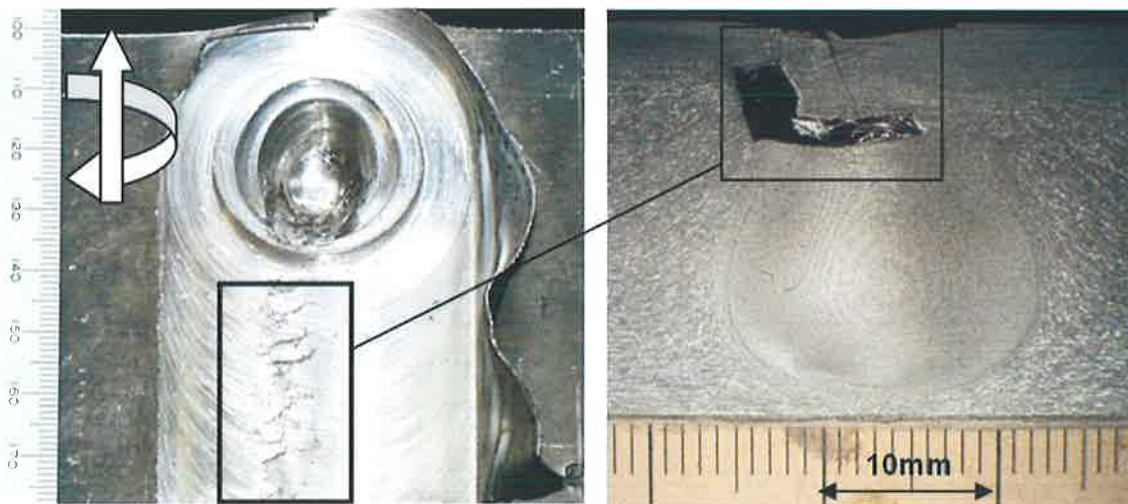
Weld 215B top view left and macrograph right with volumetric defect highlighted by the boxed section of the weld.
